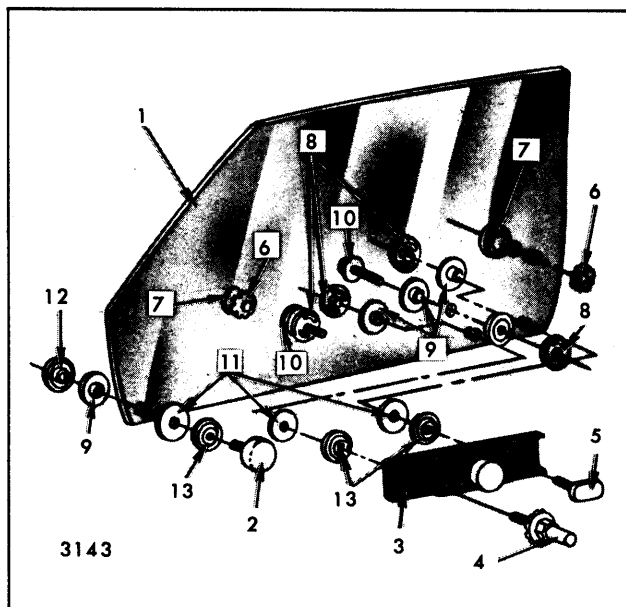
Front Door Window Assembly - "B and C-37, 47, 57, and 67" Styles
